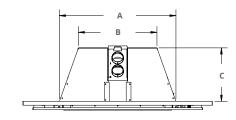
Unit dimensions (Tolerance ± 1/8") [1.25 mm]
